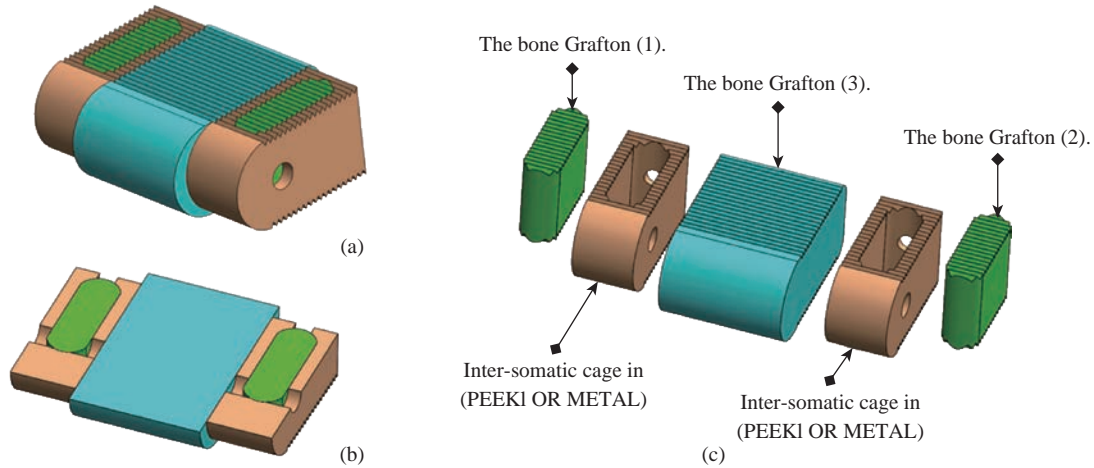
Lumbar intersomatic fusion cage bilateral approach [42-45]. (a) Isometric perspective assembly; (b) Sectional assembly; (c) Exploded view.
